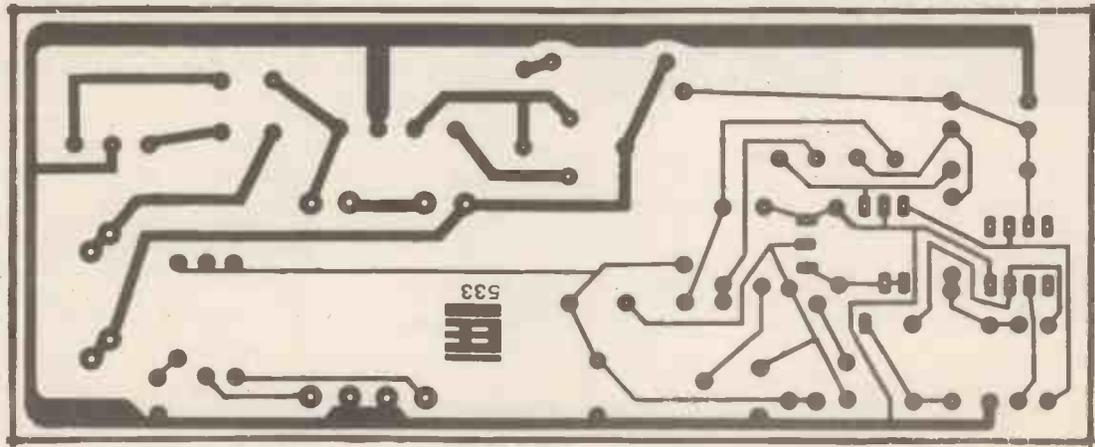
Component layout, interwiring details and full size printed circuit board master pattern for the Solar Heating Controller.
